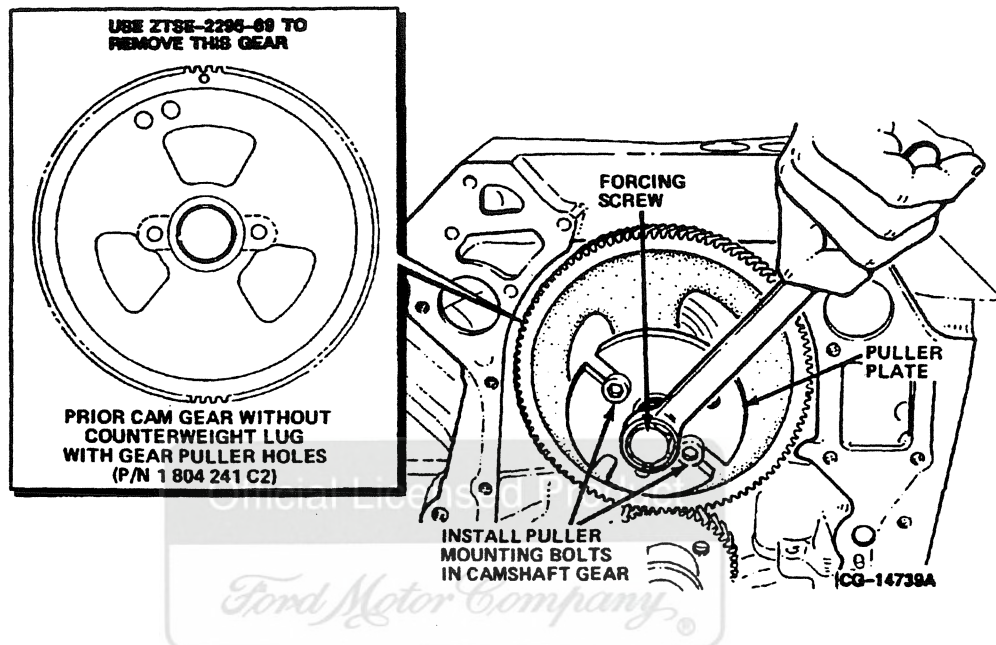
A. Removing Camshaft Gear Using ZTSE-2295-69
